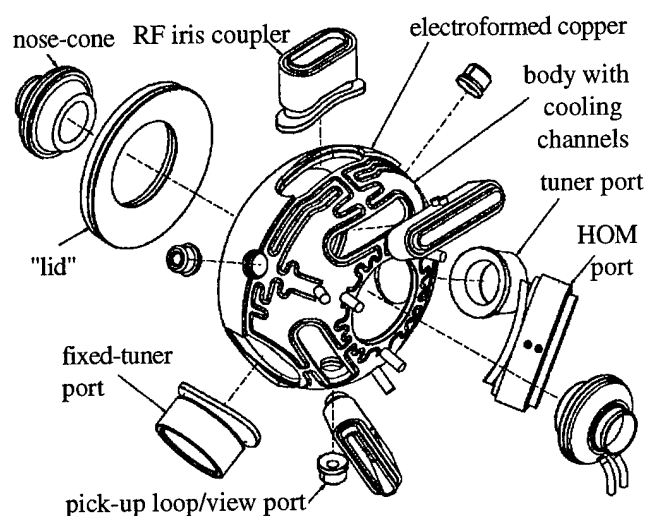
Assembly of high-power cavity showing body cooling channels on one half (exposed), equatorial and HOM port inserts, nose-cones and "lid" section.
